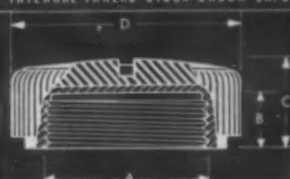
DIMENSIONS	Thread Size "A"	Depth of Thread "B"	Height of Cap "C"	diam. of Cap "D"	diam. of Cap "E"
